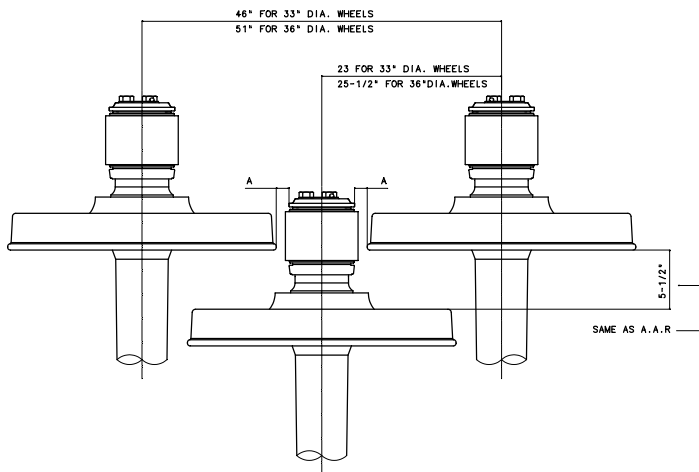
Wheel rack wheel spacing dimensions for shipping wheel and axle assemblies with bearings applied.
